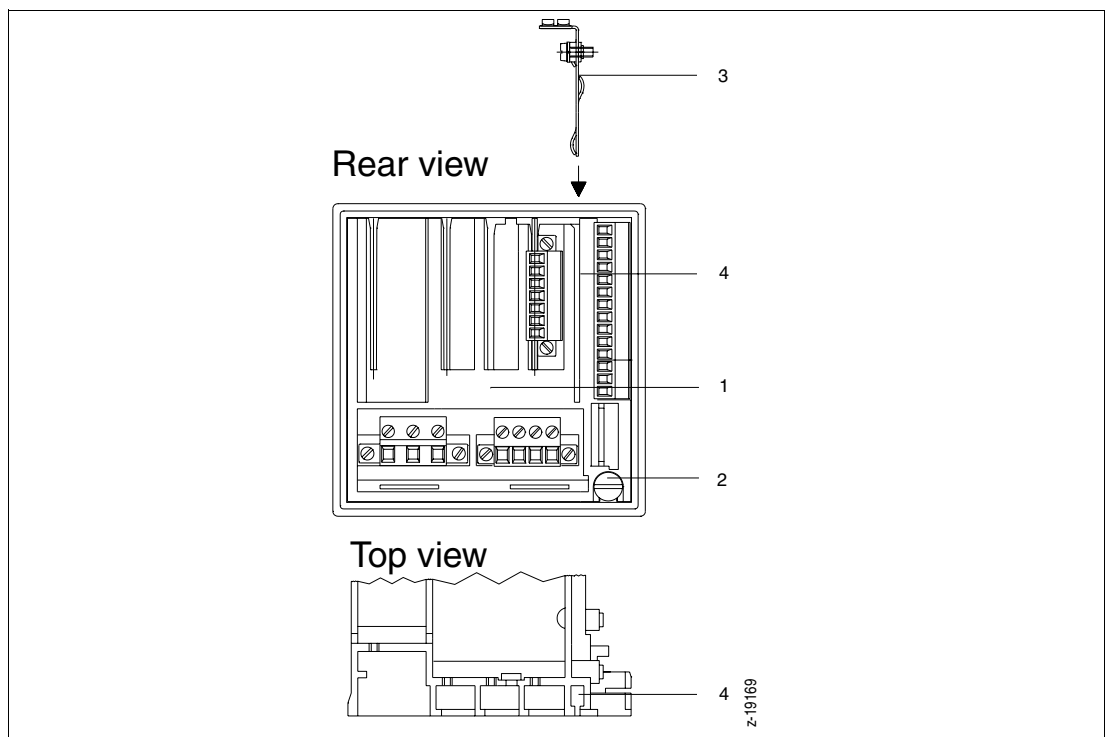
Mounting the shield terminal plate for Digitric 500
